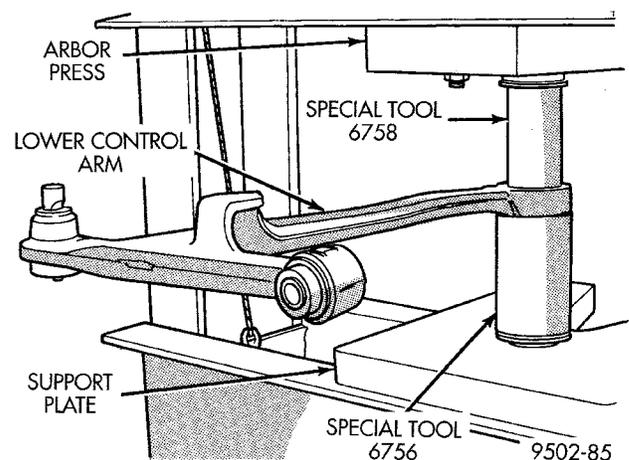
Special Tools Assembled For Removing Rear Bushing
